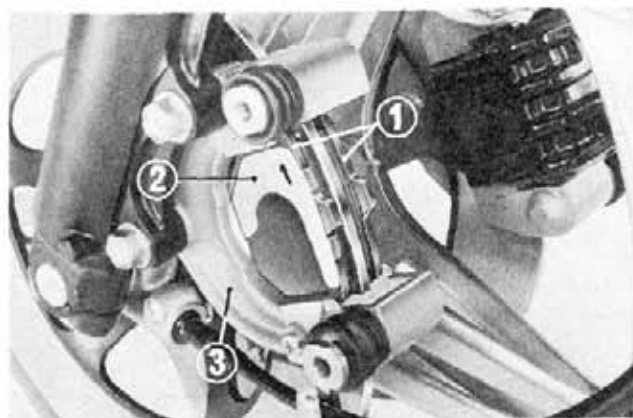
① Brake pad ② Shim ③ Caliper holder
